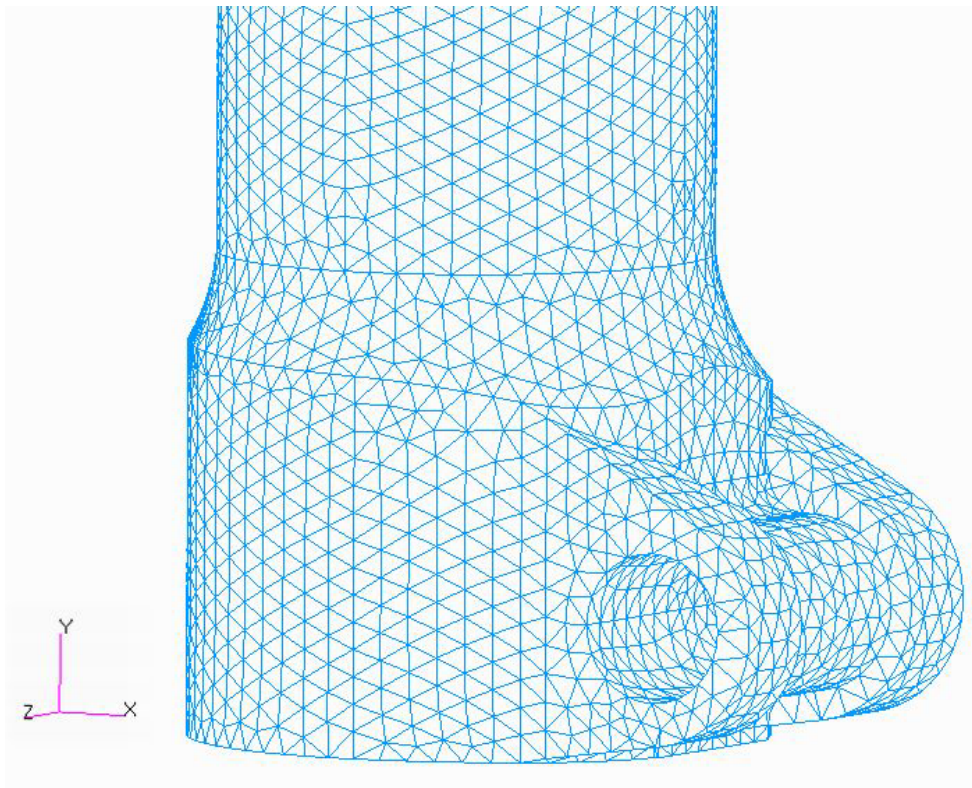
Simplified Torque Lug at Lower Outer Cylinder
